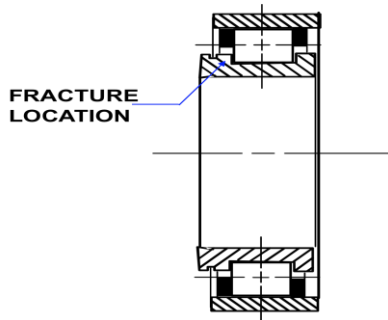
Roller Bearing Inner Race Fracture Location
